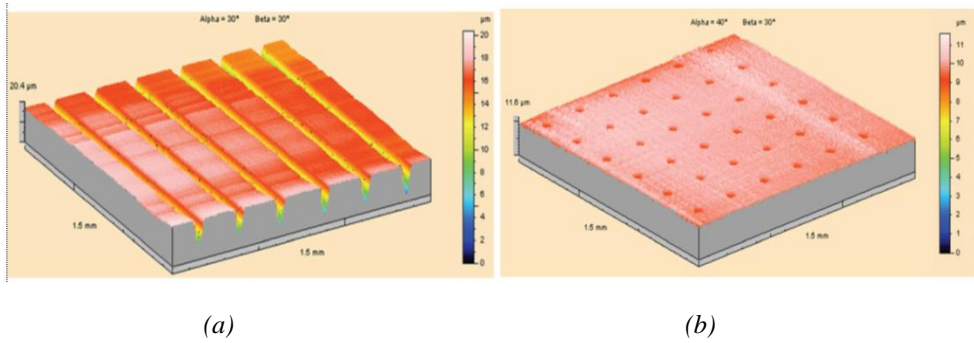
Example of laser textured surfaces with (a) grooves and (b) dimples [78].
